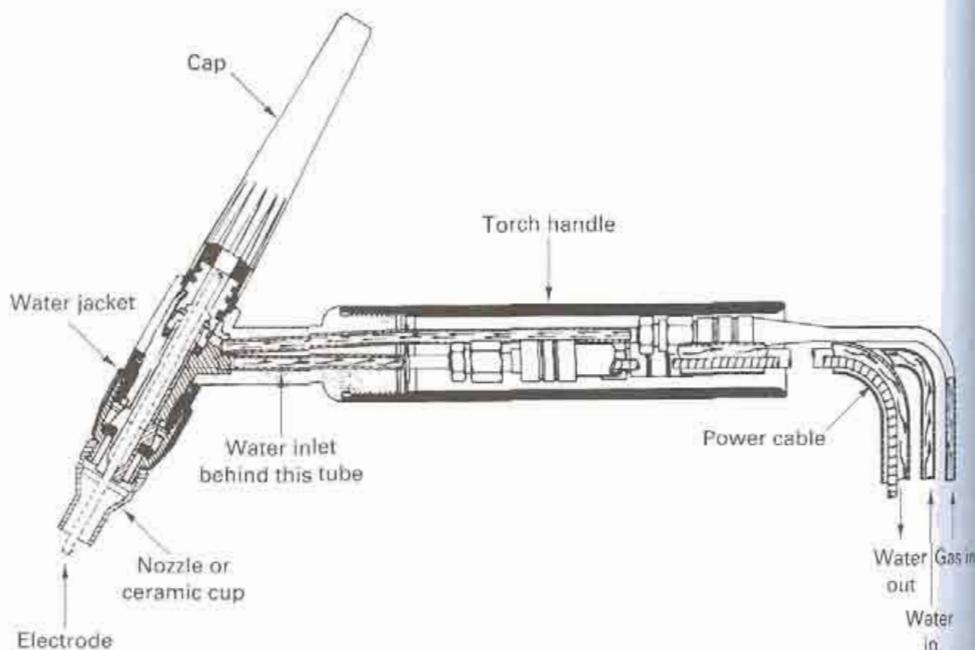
Welding torch used in nonconsumable-electrode, gas tungsten arc welding (GTAW), showing feed lines for power, cooling water, and inert-gas flow. (Courtesy of Linde Division, Union Carbide Corporation, Houston, TX)
